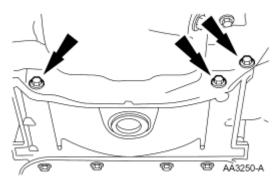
Inspection Cover & Bolts Courtesy of FORD MOTOR CO.
